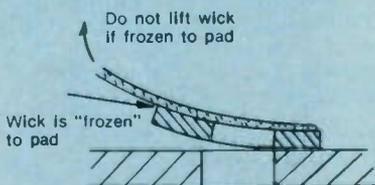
Tearing of the pad from board surfaces will result if wick is allowed to cool and stick to pad.
